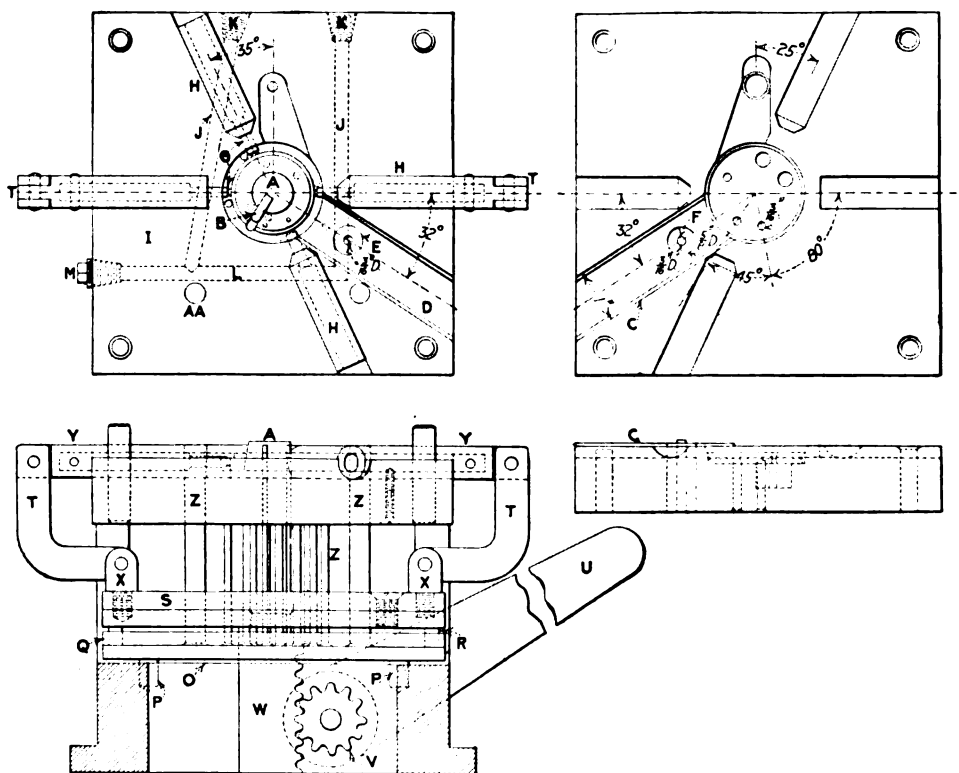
DETAILS OF TOOLS USED FOR A DIE CASTING
